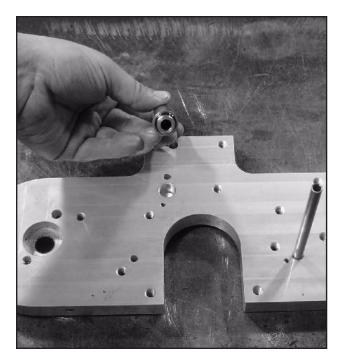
Remove the Pump Relief Valve from the Base Plate.
